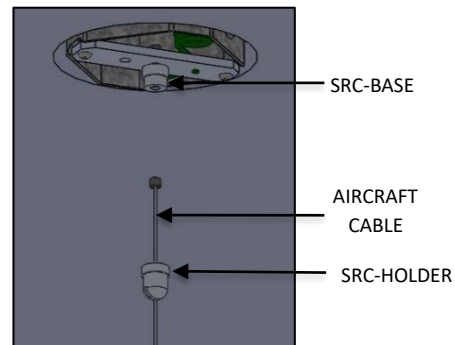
AIRCRAFT CABLE INSTALLATION
